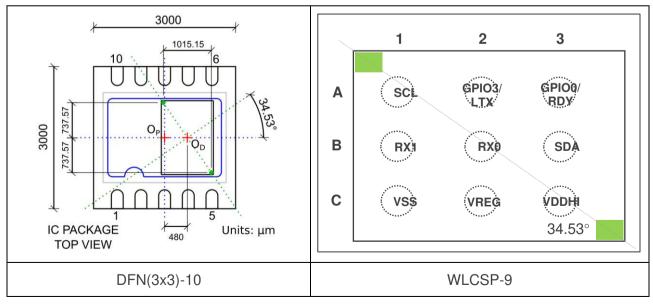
Figure 13-1 - Technical Drawing showing DIE placement within the package. The Hall-Plates are shown as the two green pads in the corners of the DIE. Package axis and hall-plate axis are also shown.
